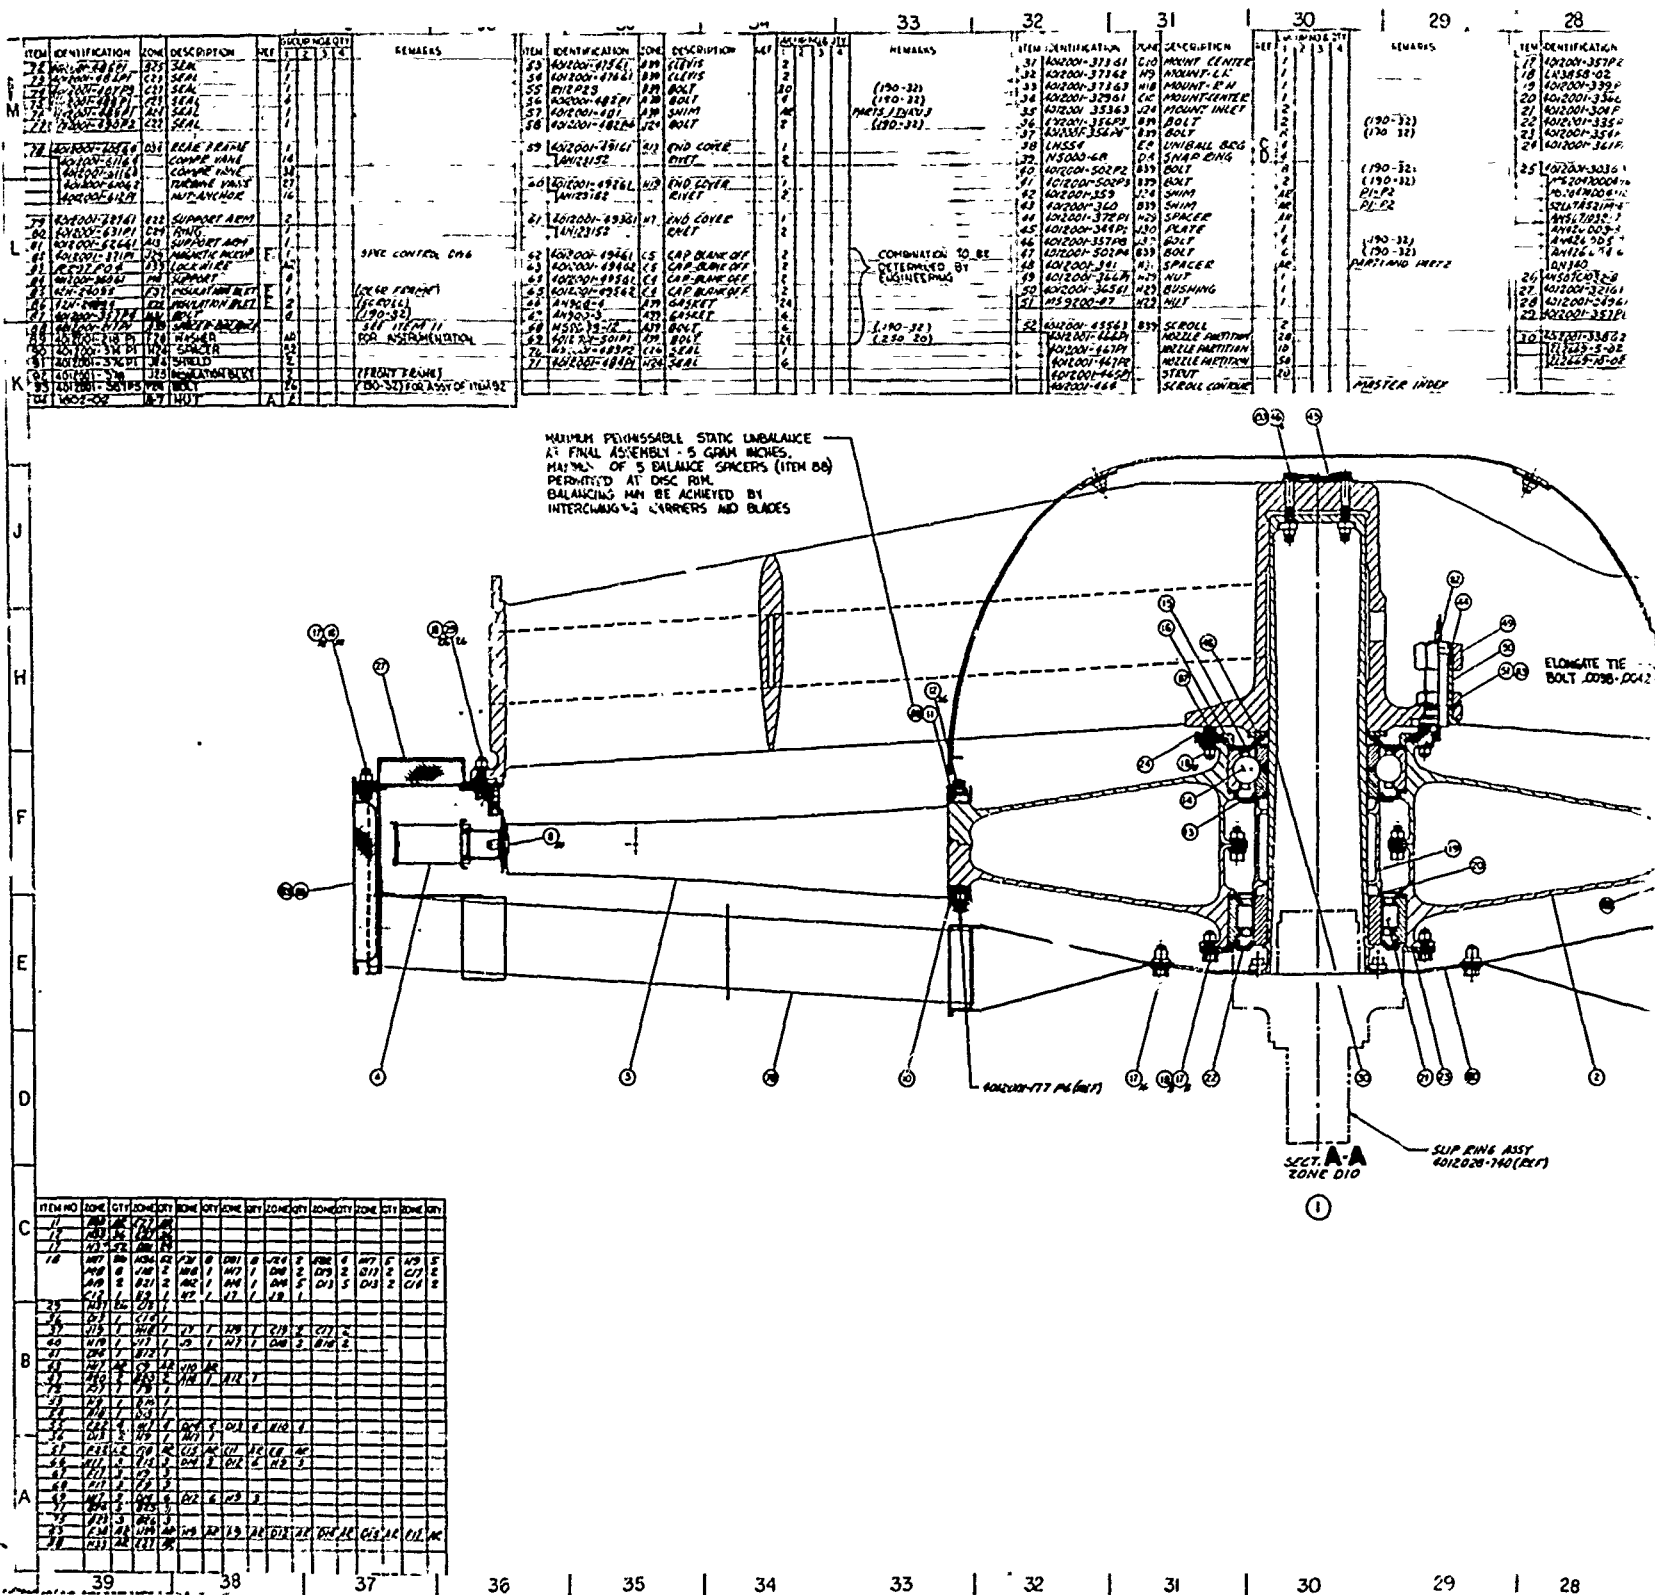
CROSS SECTION DRAWING X376 PITCH TRIM (4012001-940) Sheet 1 of 2
